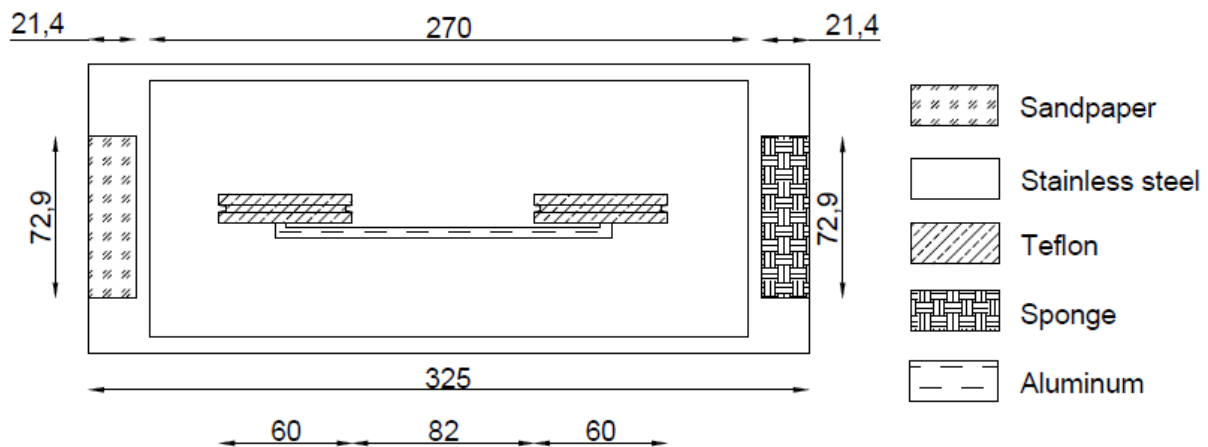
Mechanical drawing of Unit 2 – stripping unit (top view; dimensions in mm)
